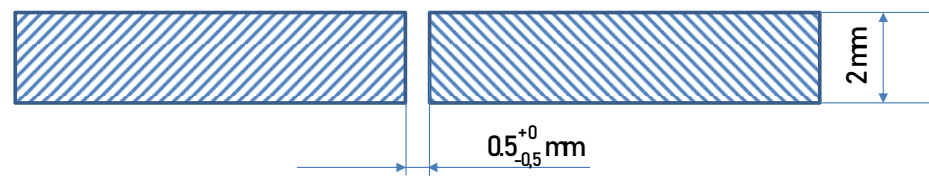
Preparation of the element for metal active gas (MAG) welding with micro-jet cooling.
